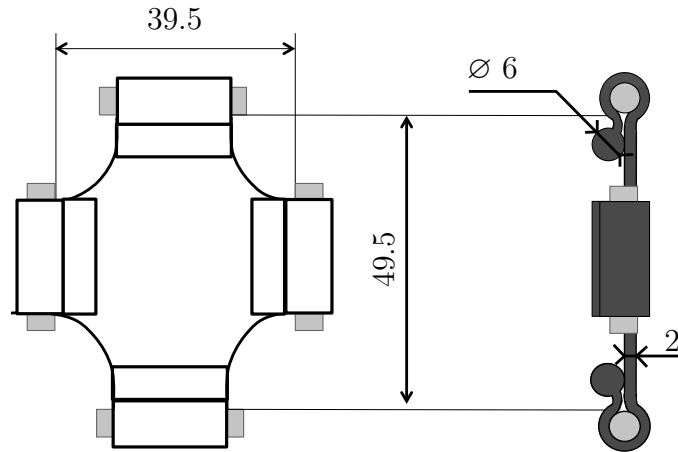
Sample geometry used for the biaxial test (dimensions in mm)
